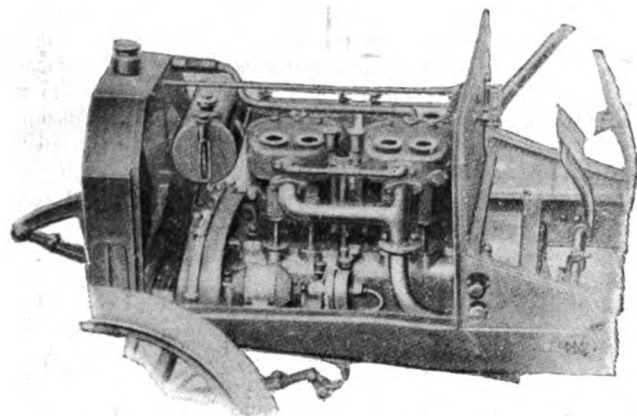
View of Engine of the Rochet-Schneider 16-20-h.p. Car, showing lubricating oil tank behind radiator.
